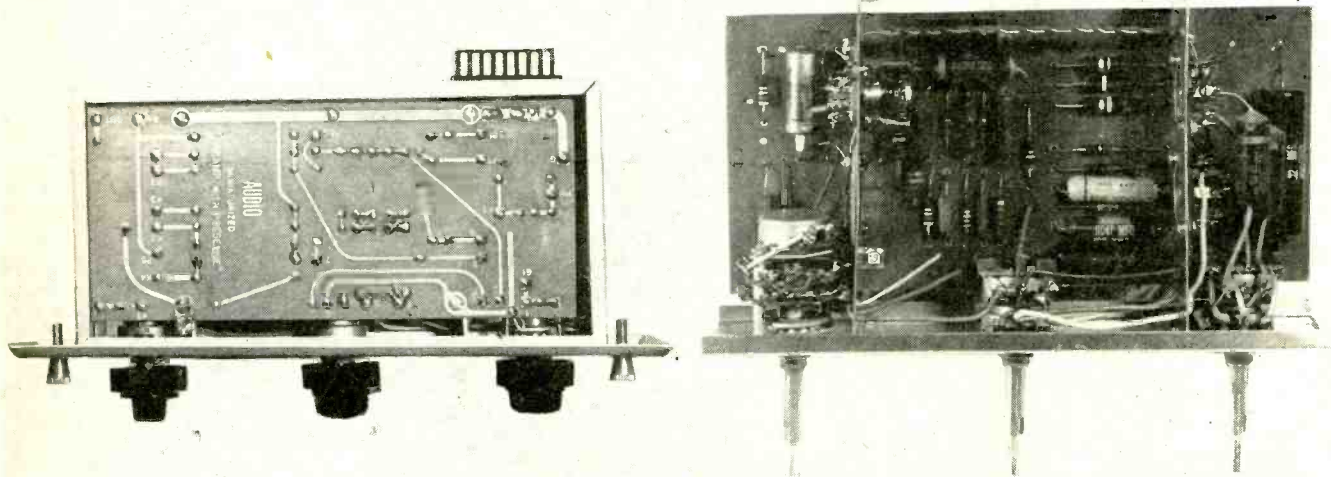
(left). Underside view of completed amplifier to show soldered component leads. Fig. 6 (right). Top view of amplifier before attaching front and rear panels.
